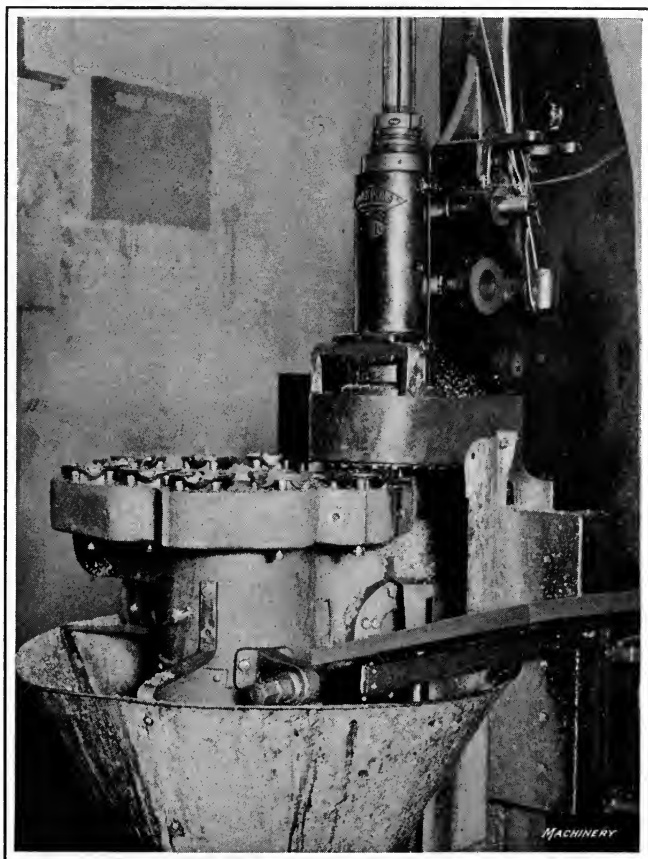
Drilling Machine equipped with Continuous Milling Fixture for Milling Universal Joint Rings
